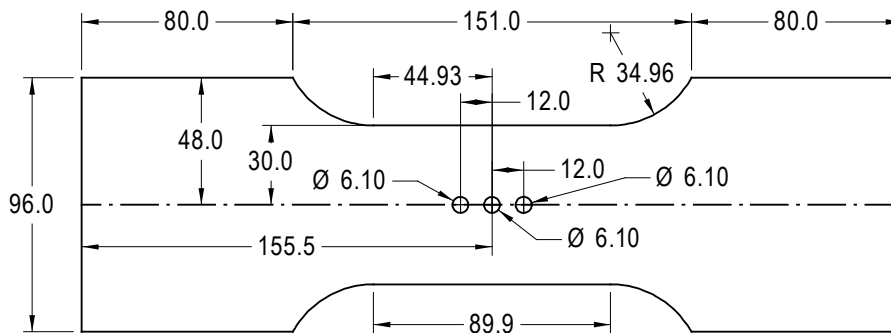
Engineering drawing of the high- $k_t$  fatigue specimens. The specimens were 6.35 mm thick and were machined from 7050-T7451 aluminum alloy. All dimensions are in millimeters.
